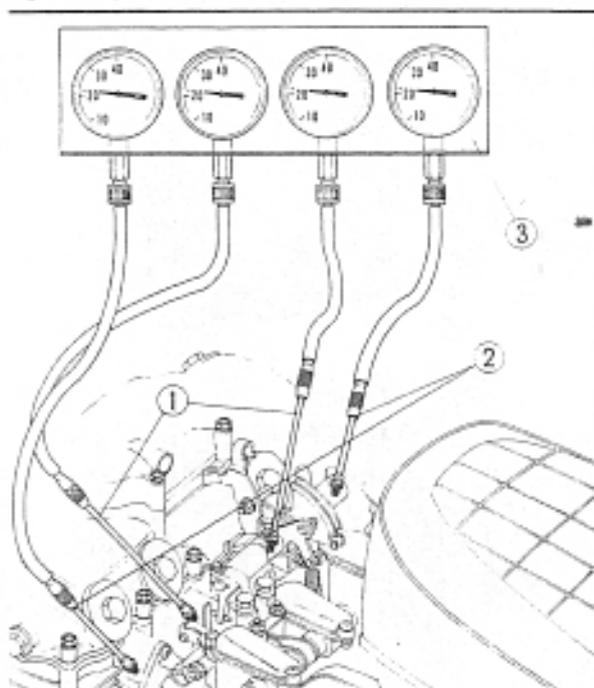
① Adaptor A ② Adaptor B ③ Vacuum gauge
